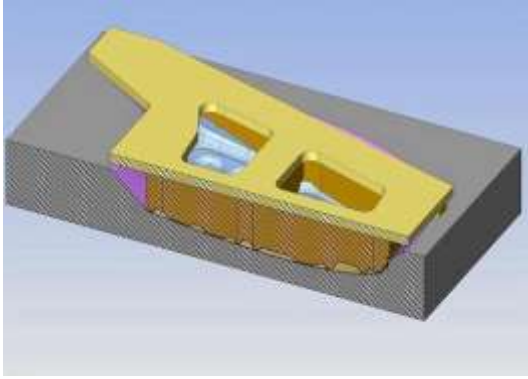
Cutaway view showing the pressing frame used for clamping the hood assembly into the cavity half of the outer skin tool (image courtesy of RangerPlast).
